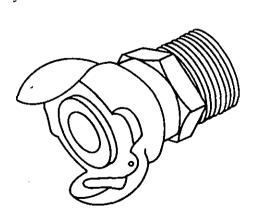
MALE-THREAD COUPLING, TYPE III.
